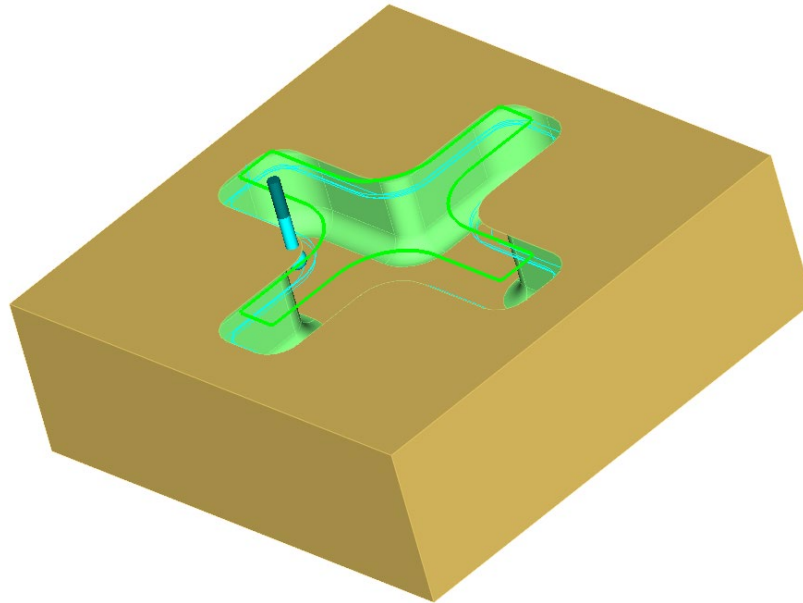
Initial Horizontal Z Contours tool path colliding with the part
